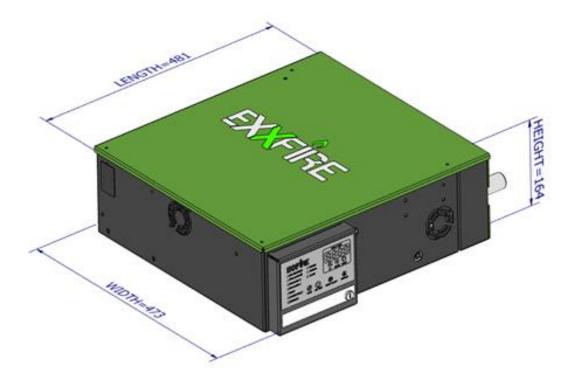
Product dimensions (EXX-1500CNF flex-User Interface mounted at right side panel)
